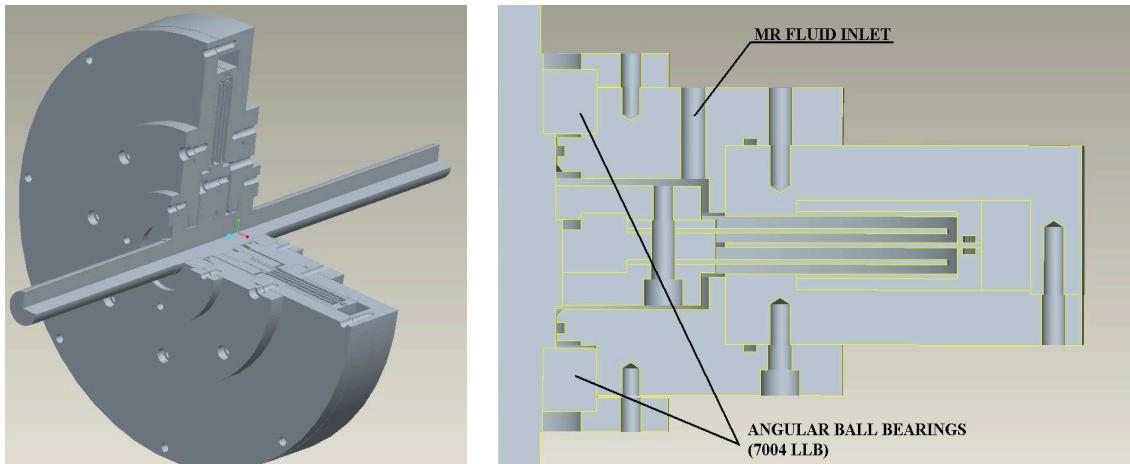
MRB CAD model (L) and cross-section of the MRB CAD model with bearings, screw holes and seal beds (R)
